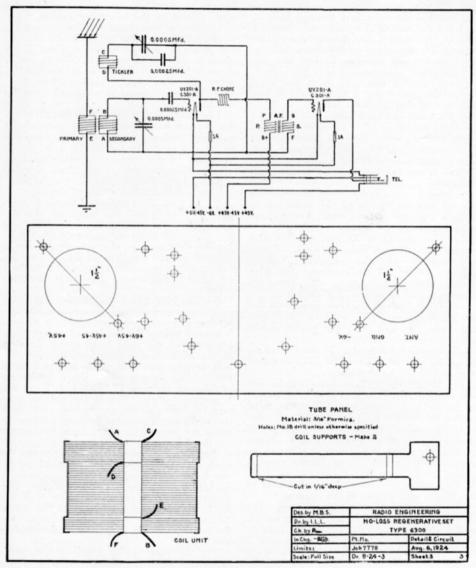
Cne-half scale drawings of the tube panel, coil unit, and coil supports, as well as a schematic wiring diagram illustrating the circuit system
